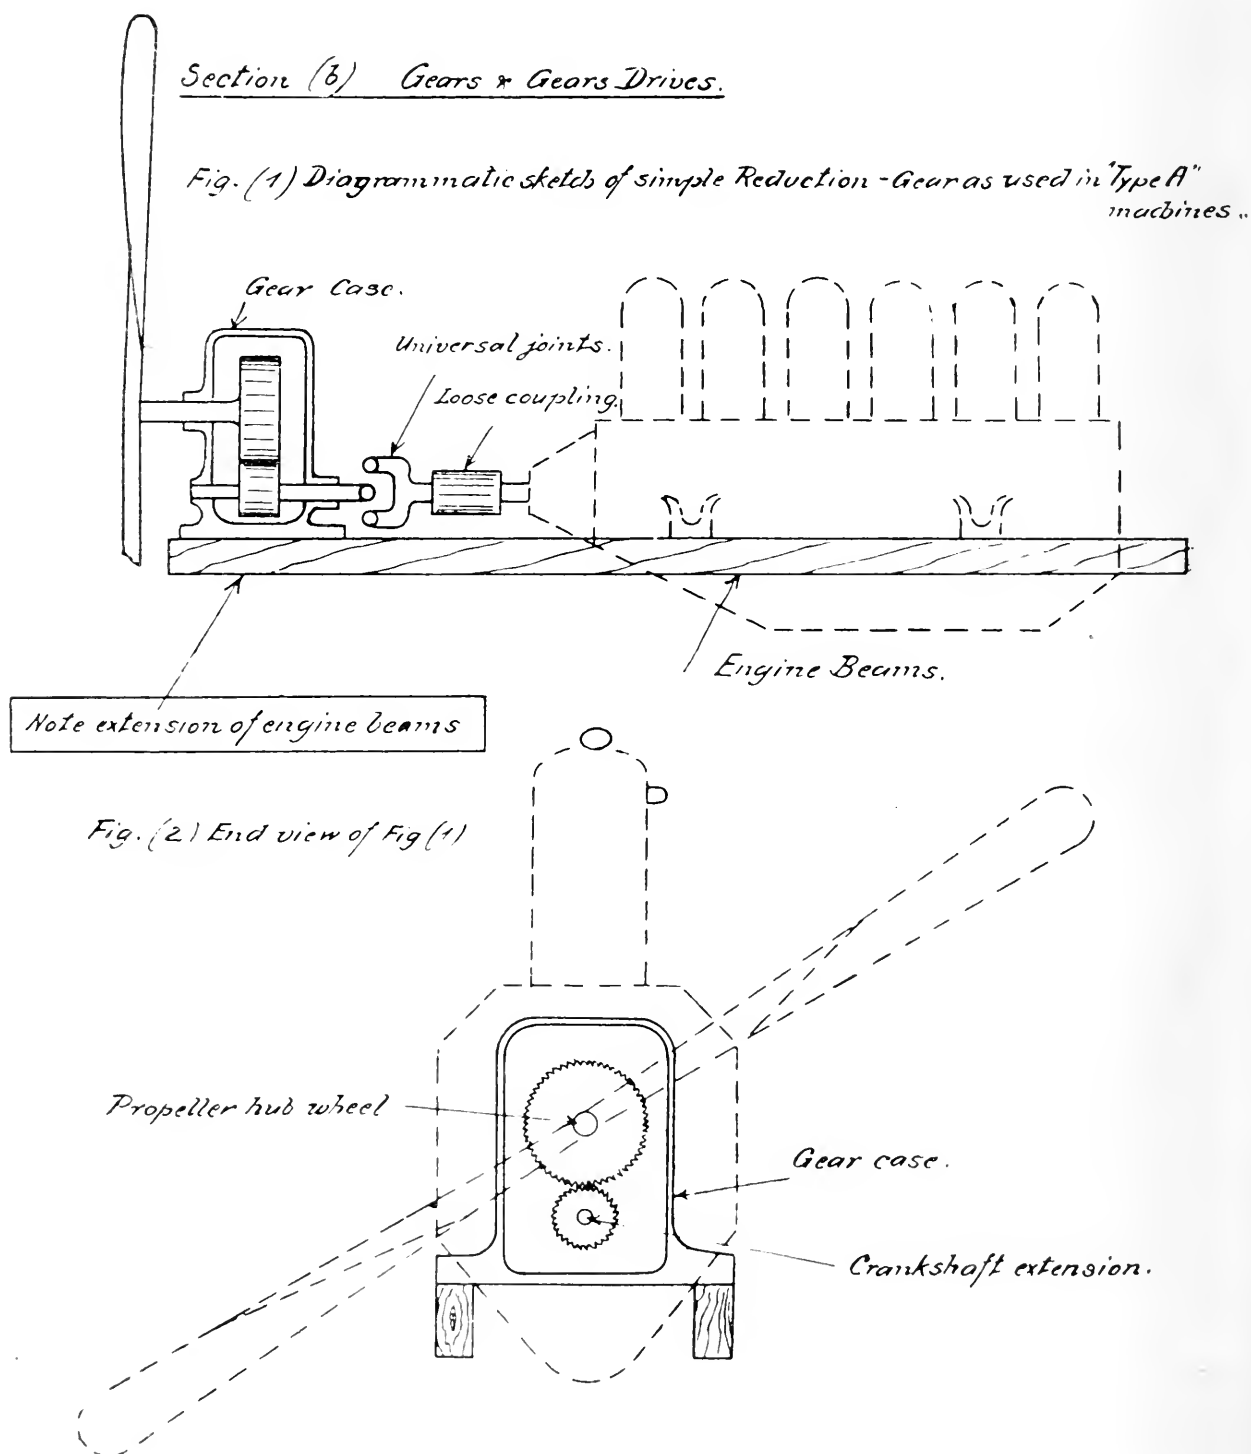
and 2 illustrate the general arrangement of the type of gear in use on the "Type A" giant machines. The arrangement, as can be seen at a glance, is quite simple, but involves the employment of much longer and heavier engine bearers than would normally be required, and further necessitates the fitting of a universal joint and loose coupling between engine and gear box. In addition to this the gear boxes require a special lubricating system with their own oil-cooling radiators, oil reservoirs, "sight" thermometers, etc. All these details are redundant to the ordinary reduction gear arrangement as fitted in the Entente V-type motors.
